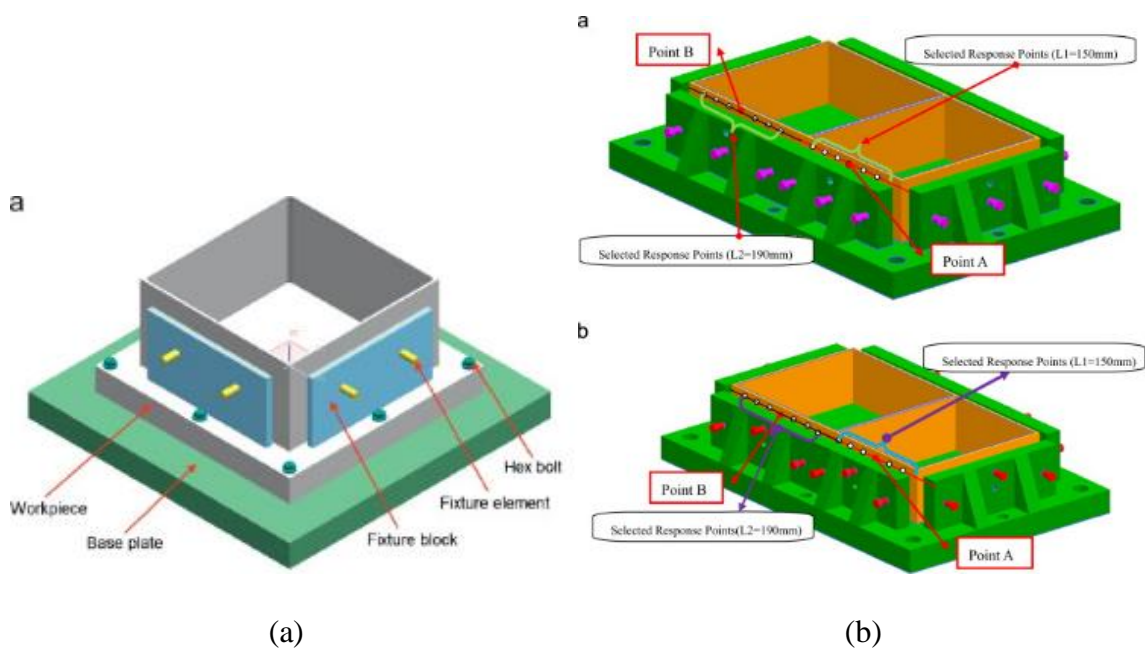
Designs of fixtures for thin-wall machining [195, 196].
